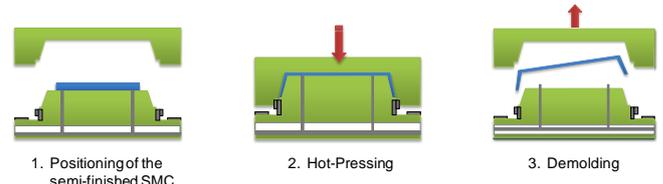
Manufacturing process (hot-pressing) of the SMC part [4]
